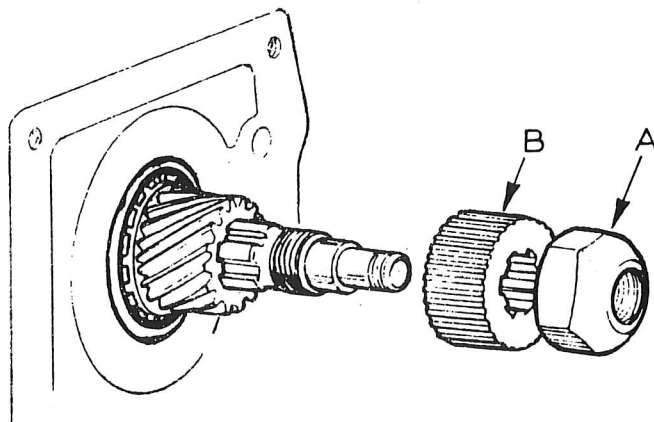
5th. GEAR PINION, ADAPTOR AND NUT
